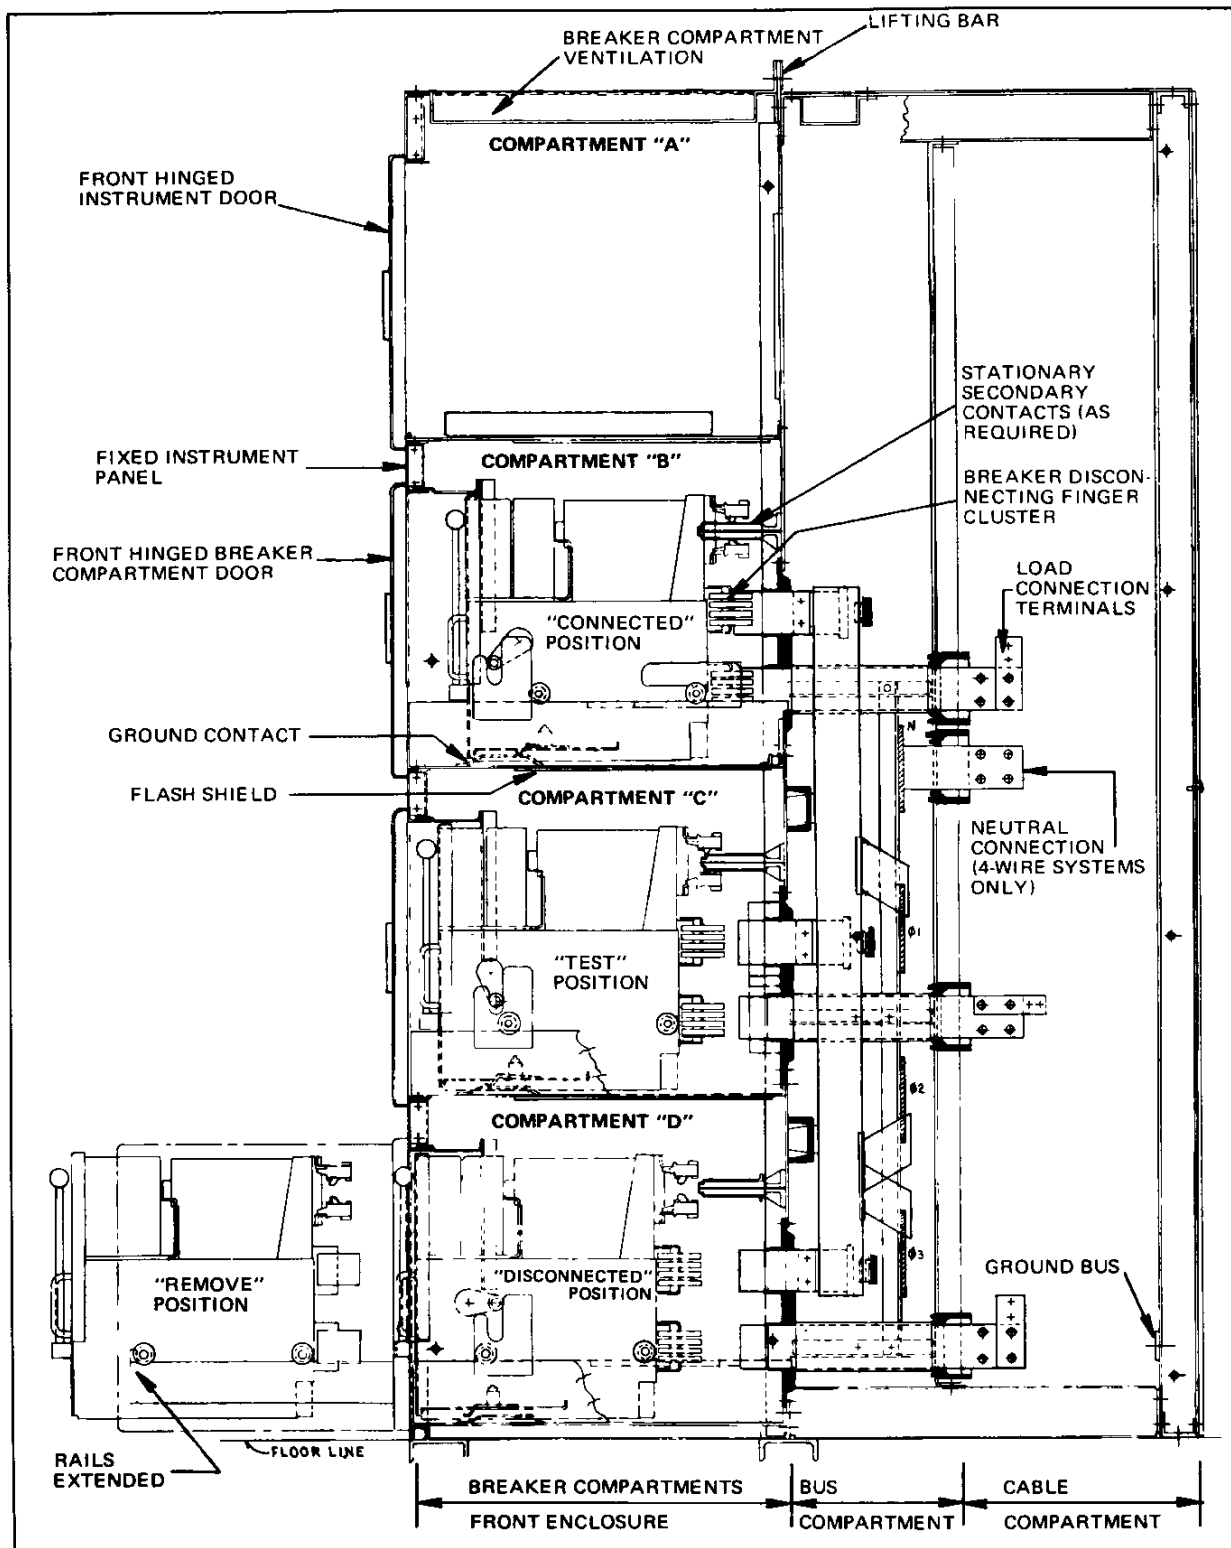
Side View 1600 Amp Unit with Welded Aluminum Bus
